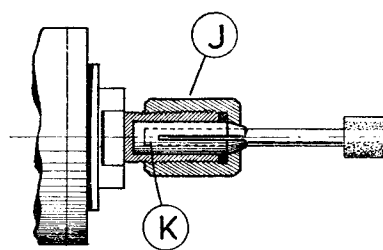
End of the spindle, showing the chuck collar (J) and the collet (K)
